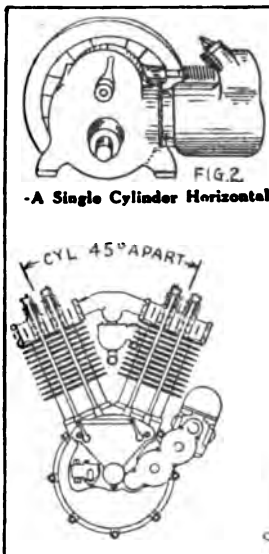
A single cylinder horizontal type of engine, with water cooled cylinder. Formerly used on light weight automobiles. Seldom used, valves mechanically operated.
